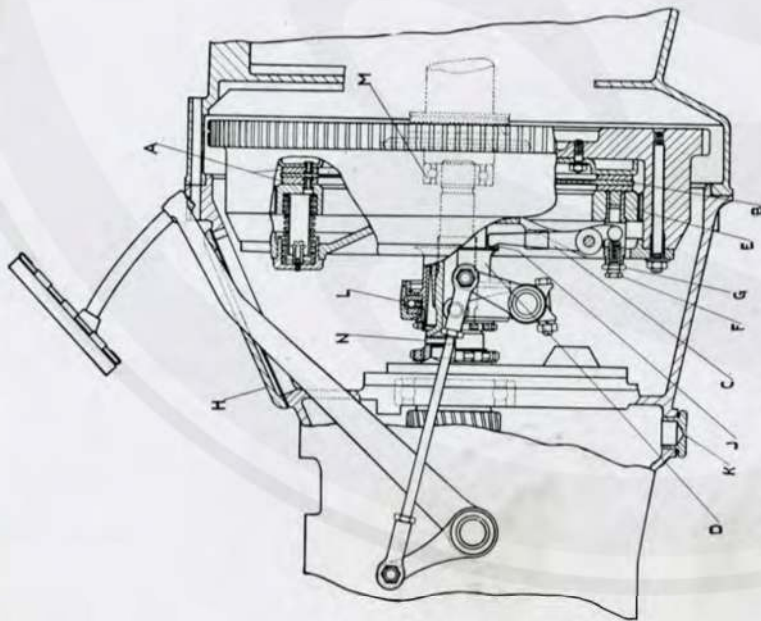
PART - SECTIONAL VIEW OF CLUTCH.
